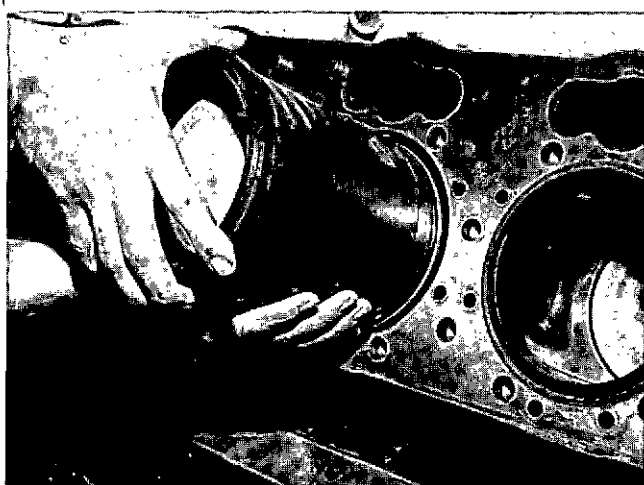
, V414120. Installing piston and liner assembly in block
